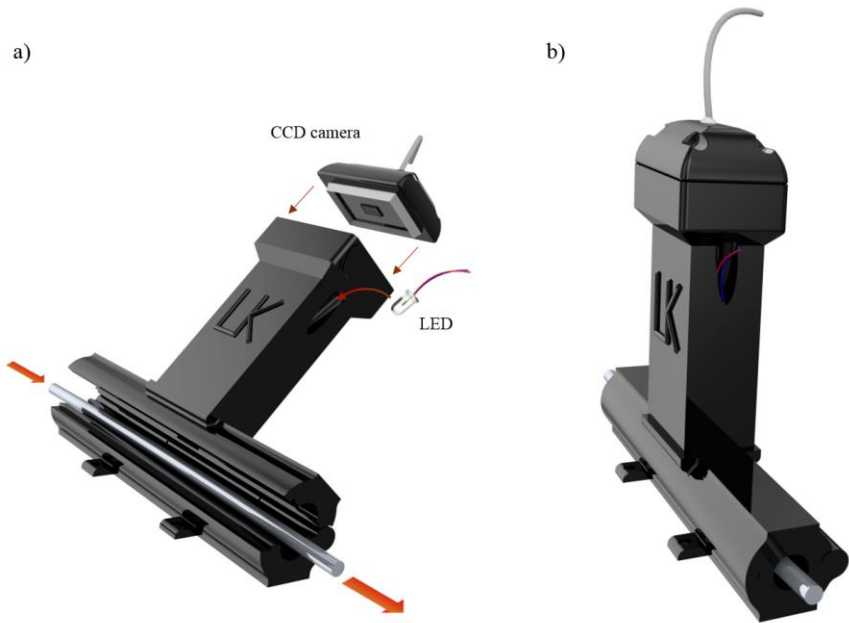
a) Rendering of the open sensor housing, displaying the wire drawing direction, the placement of the CCD-camera and the LED b) Closed housing (Figure from Paper IV)
